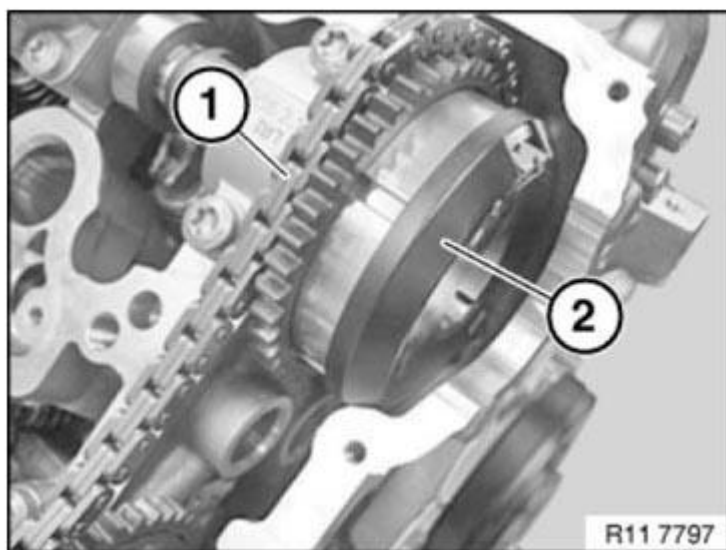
Identifying Exhaust Adjustment Unit And Timing Chain
